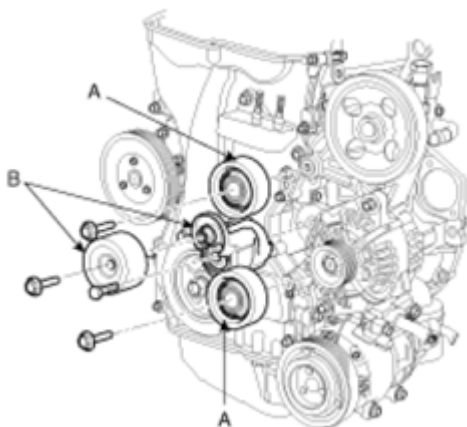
Installing Drive Belt Tensioner, Tensioner Pulley, & Idler Pulley
